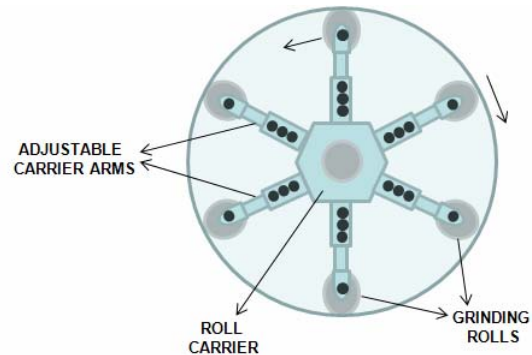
Arrangement of the grinding rolls on the roll carrier - front view.
